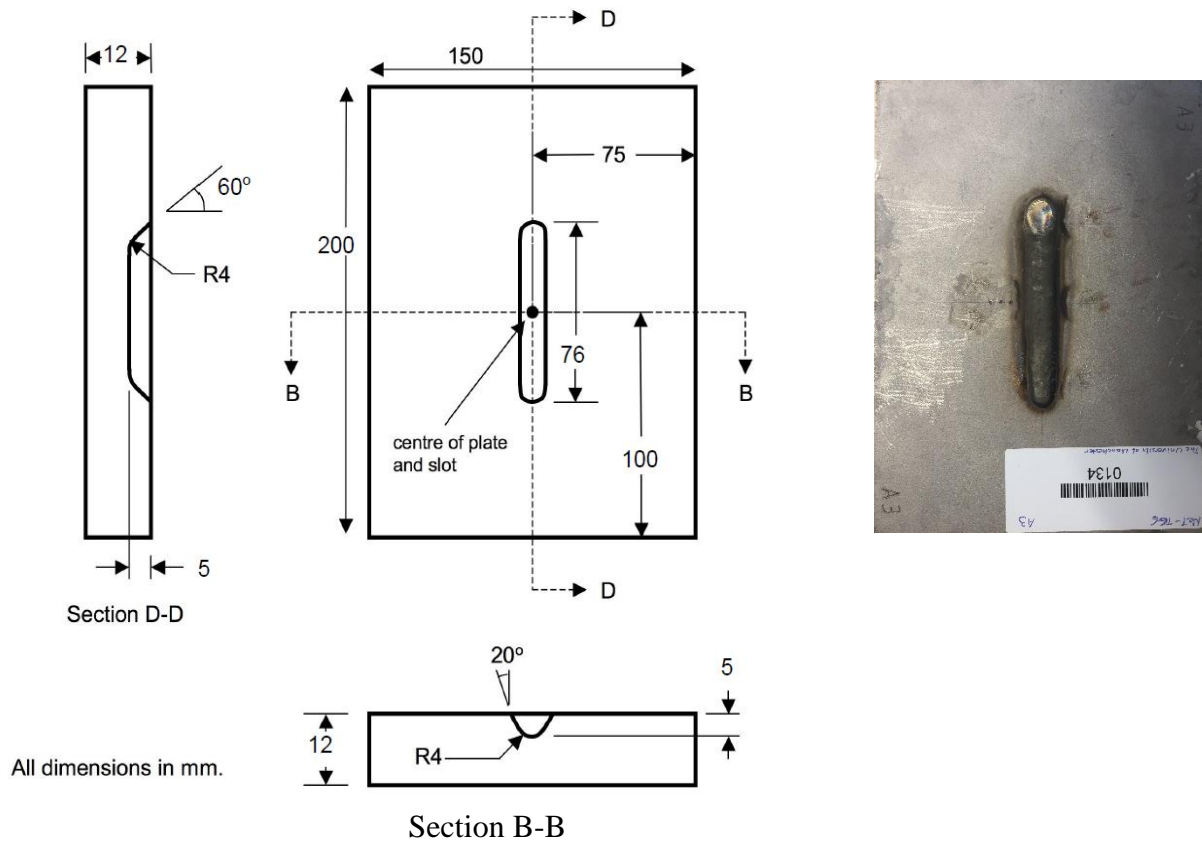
Schematic view of the TG6 weld benchmark design and a picture of TG6 plate A3.
